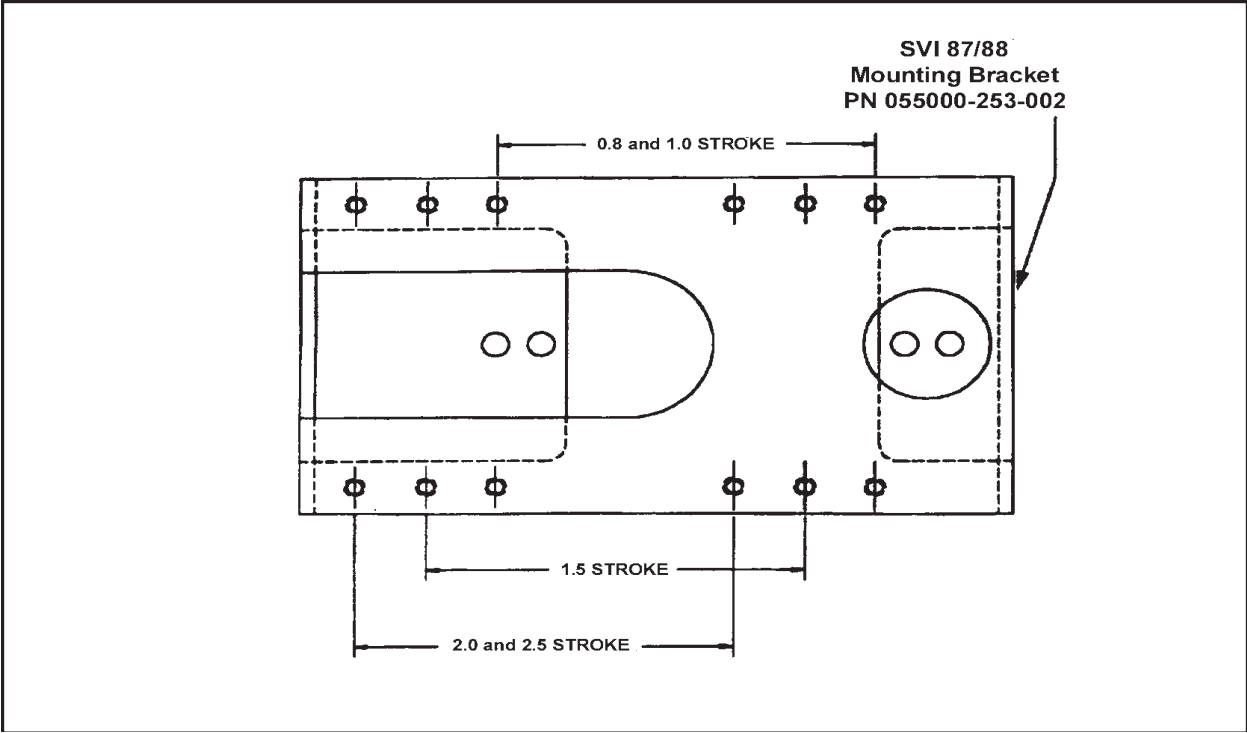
SVI Mounting Bracket for 87/88 Multi-Spring Actuator
